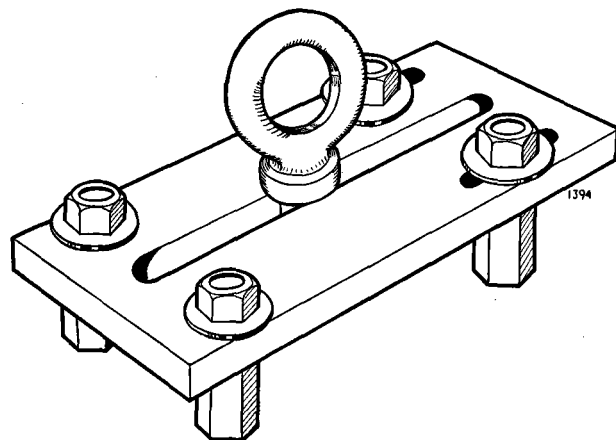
The engine lifting plate, Churchill Tool No. J.8.
